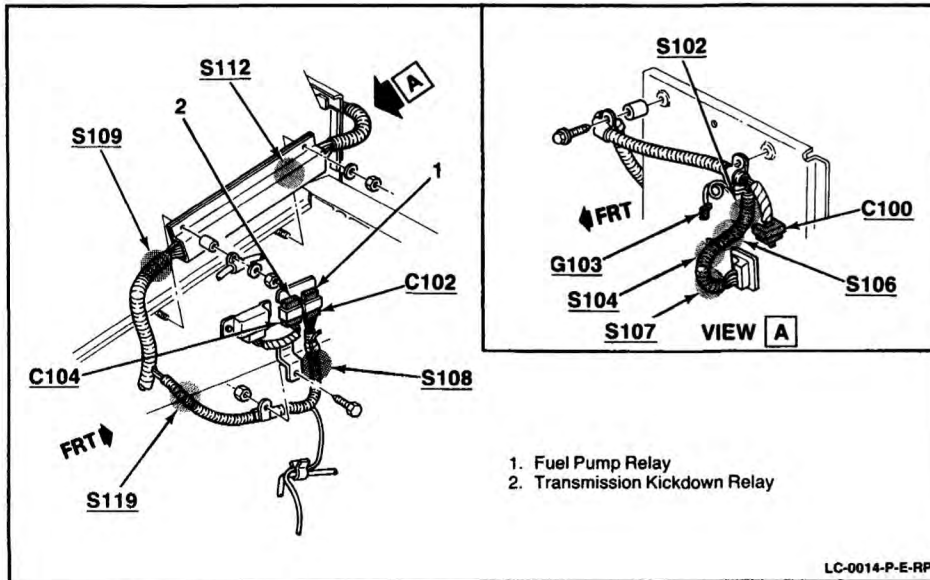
Engine Wiring Harness to Cowl (RPO L19 w/P32)
